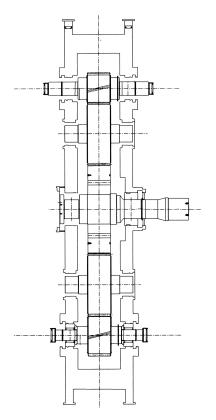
Gear Casing with Integrated Intermediate Gearing (Five Shaft Gear).
